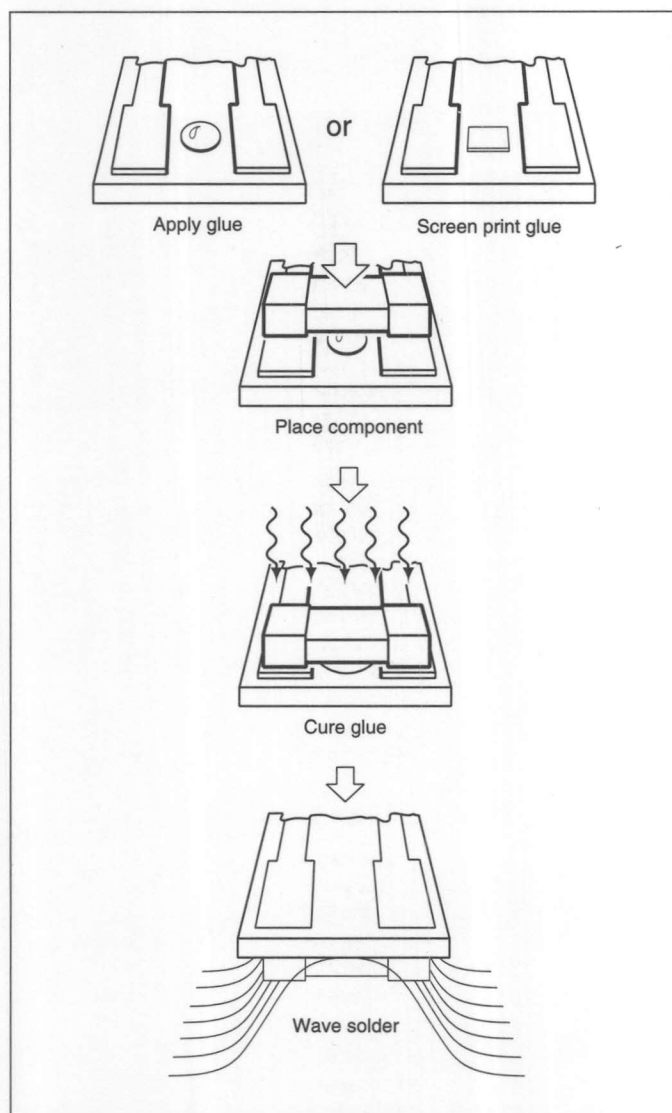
Wave Soldering PCBs With Surface Mount Devices Only
